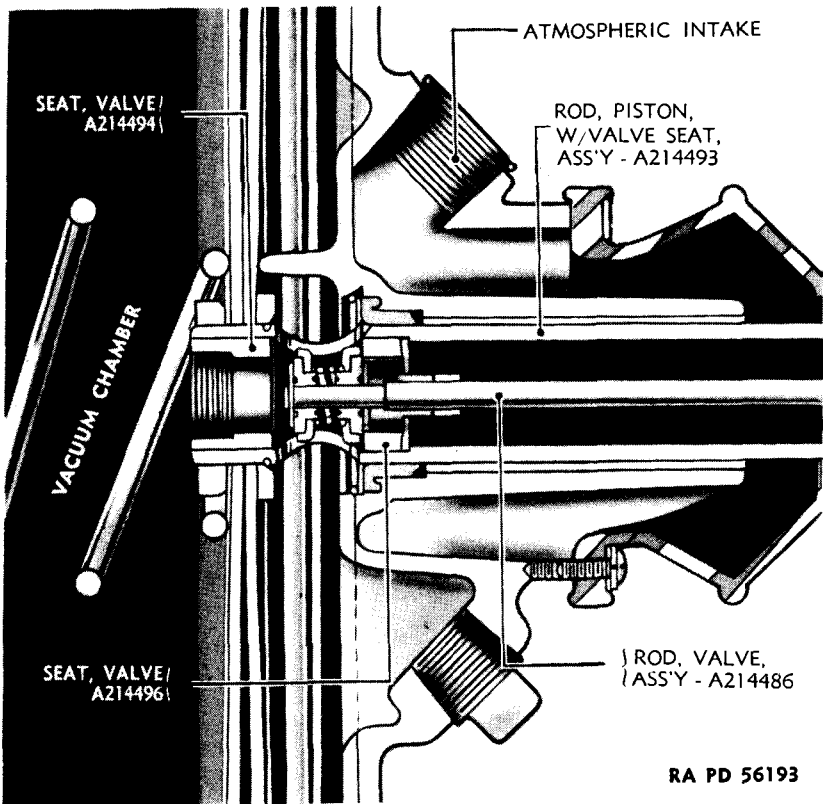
Vacuum Booster Valve Mechanism—Sectionalized
